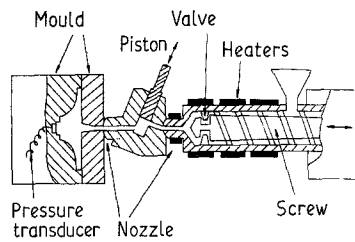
Schematic representation of the oscillating pressure valve and other moulding equipment.
